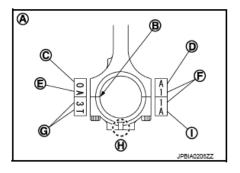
Identifying Stamped Cylinder Number Marks On Connecting Rod Courtesy of NISSAN MOTOR CO., U.S.A.
